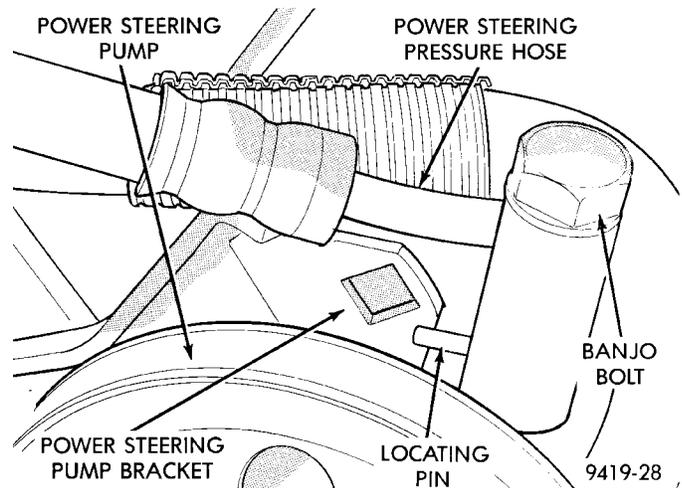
Power Steering Hose Attachment To Power Steering Pump
